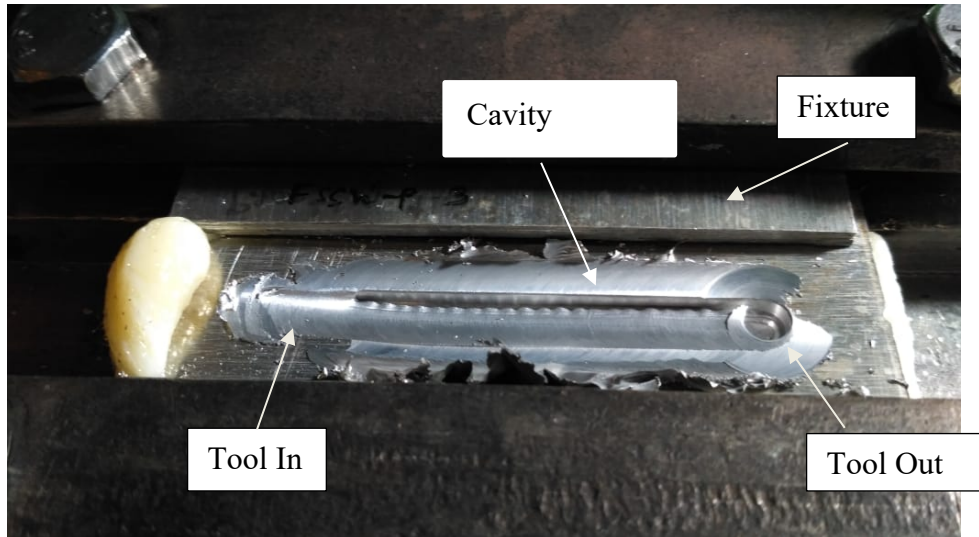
Friction Stir welding at higher speed of 1900 rpm
